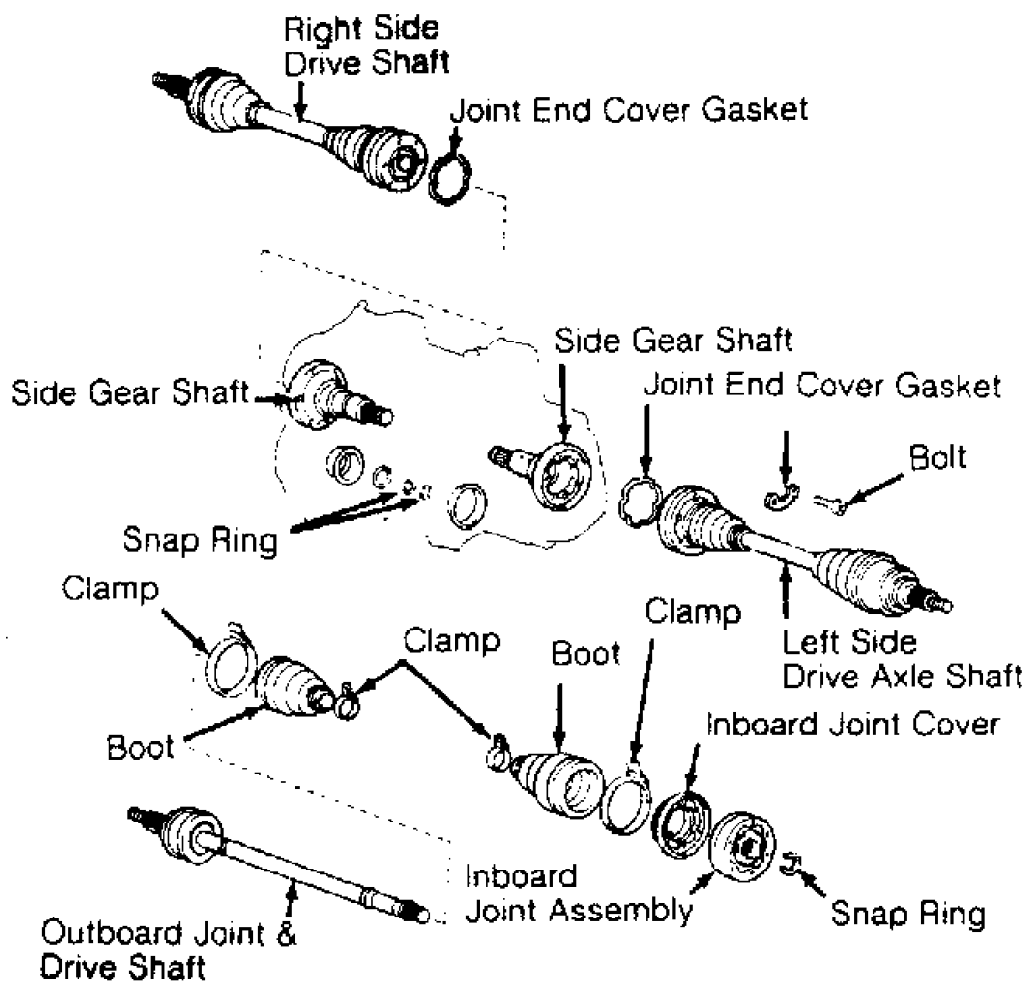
Exploded View of Celica All-Trac Drive Axle Shafts
